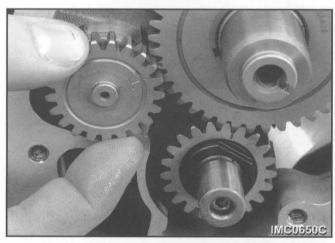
Timing marks aligned between breather valve and camshaft gears
